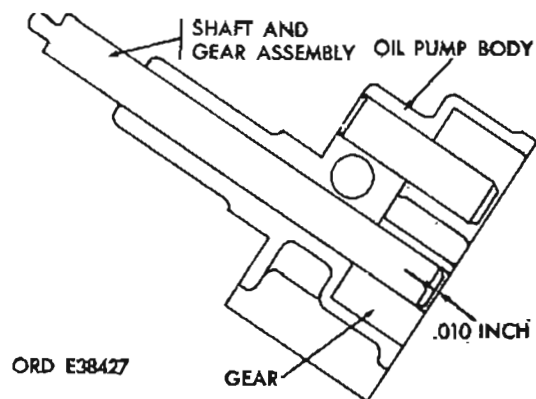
Oil pump, installation of drive gear, and gear and shaft assembly.
